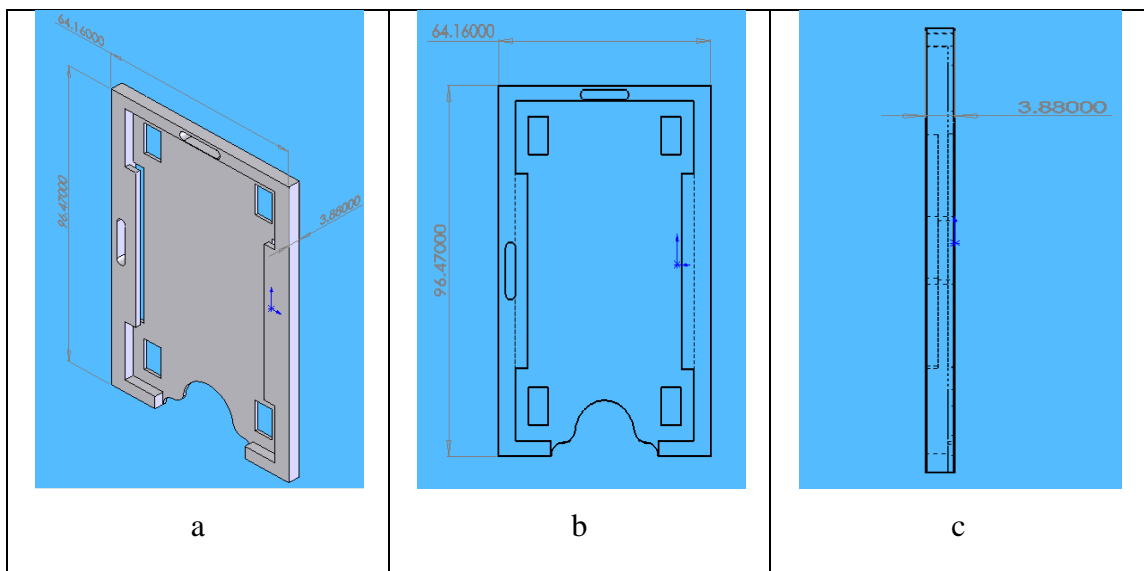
(a) Matric Card Holder 3D view, (b) Front View (c) Side View
